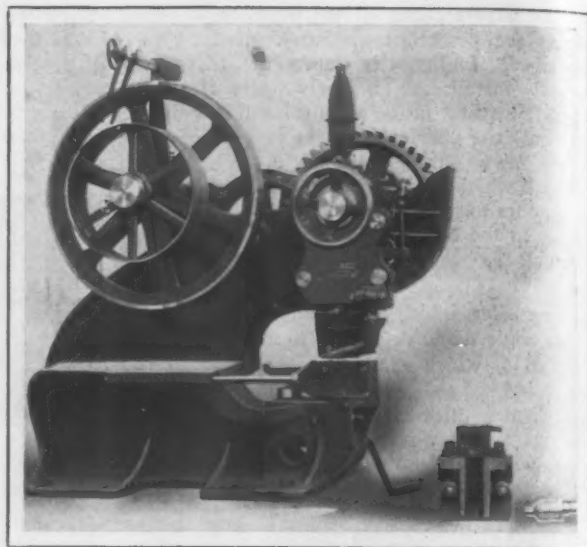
The Machine Arranged as a Splitting Shear with Plate Spreading Device
